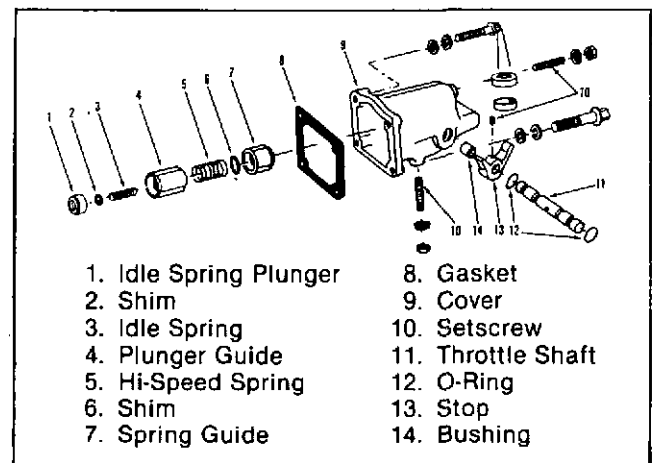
, (F5152). SVS governor spring assembly — disassembled view.
